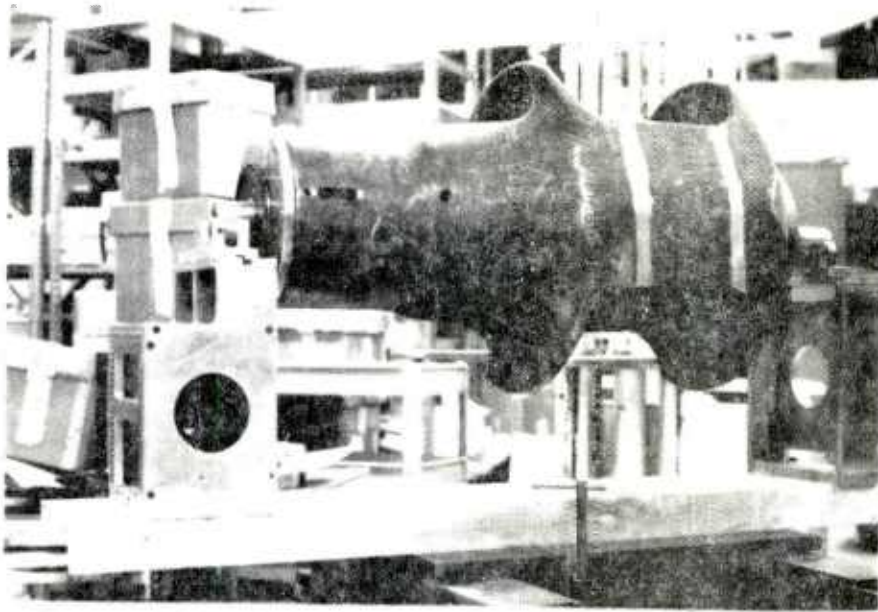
Muzzle brake assembly - in weld fixture
